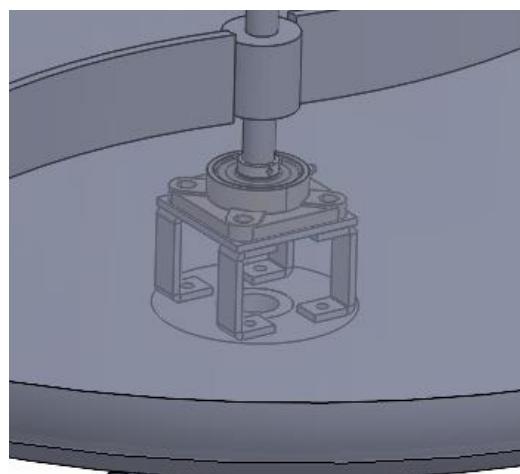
CAD Model of the Bearing Housing and Riser Plate
